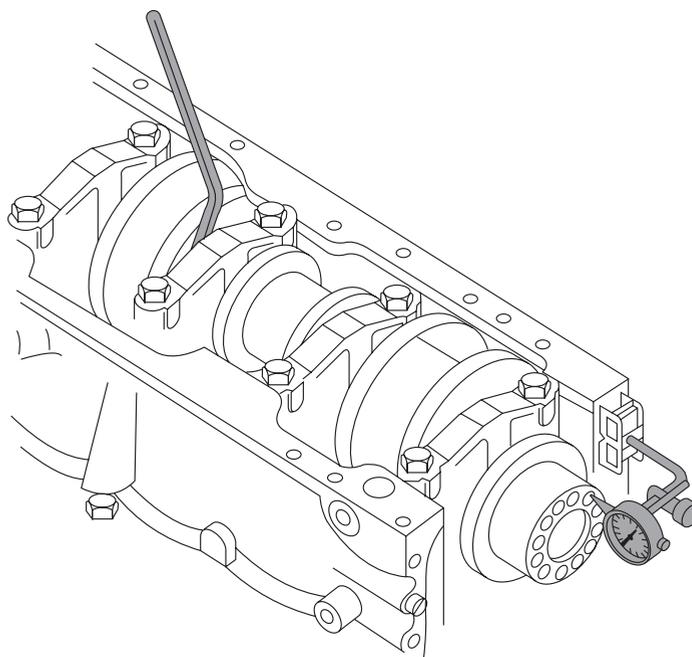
Measuring the crankshaft end play with a dial gauge
